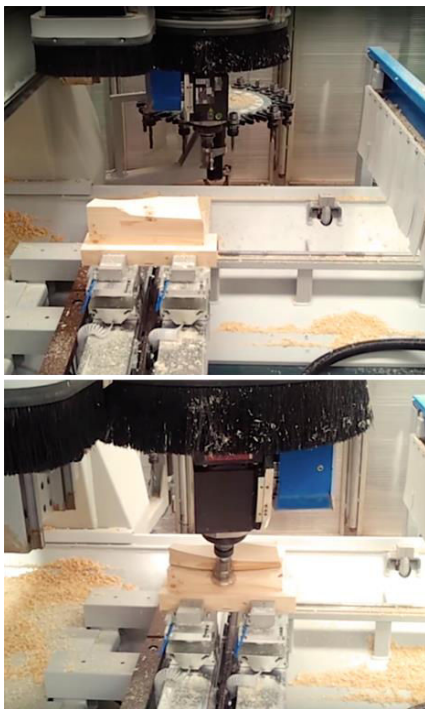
5-axis wood machine center. Top. The CNC machine chooses a tool from a set, according to the cutting and finishing program defined through a CAM environment. Bottom. The machine performs a roughing/finishing routine. Still on: <https://www.youtube.com/watch?v=ISkJ5SjebVc>
